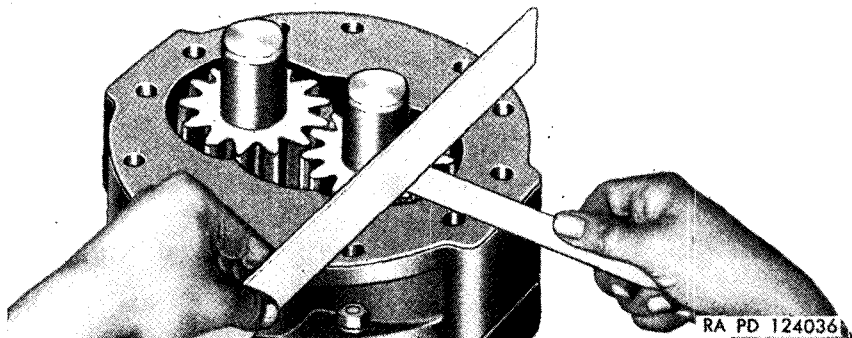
Measuring thickness of shim-type gasket under hydraulic pump cover.
